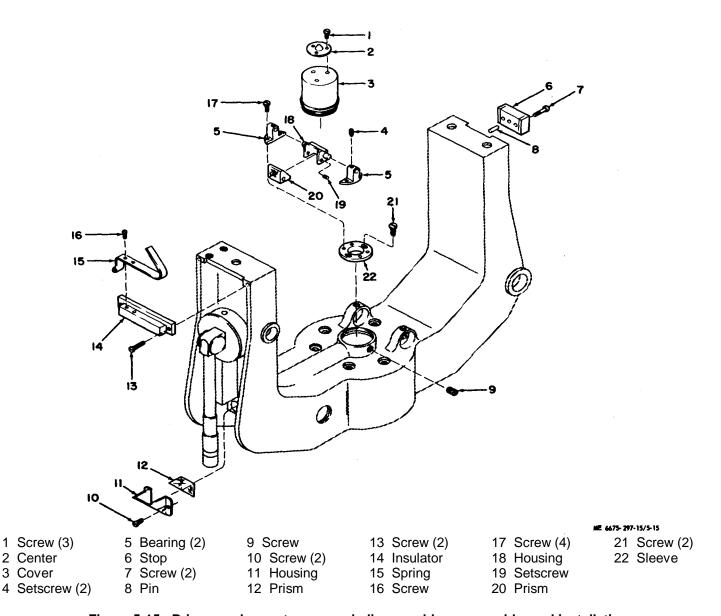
Prisms and mounts; removal, disassembly, reassembly, and installation.
